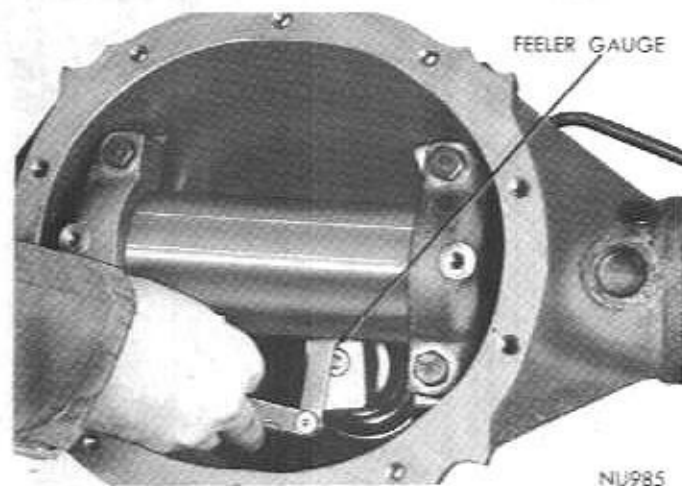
Determining Proper Shim Pack Thickness for Drive Pinion Depth of Mesh
